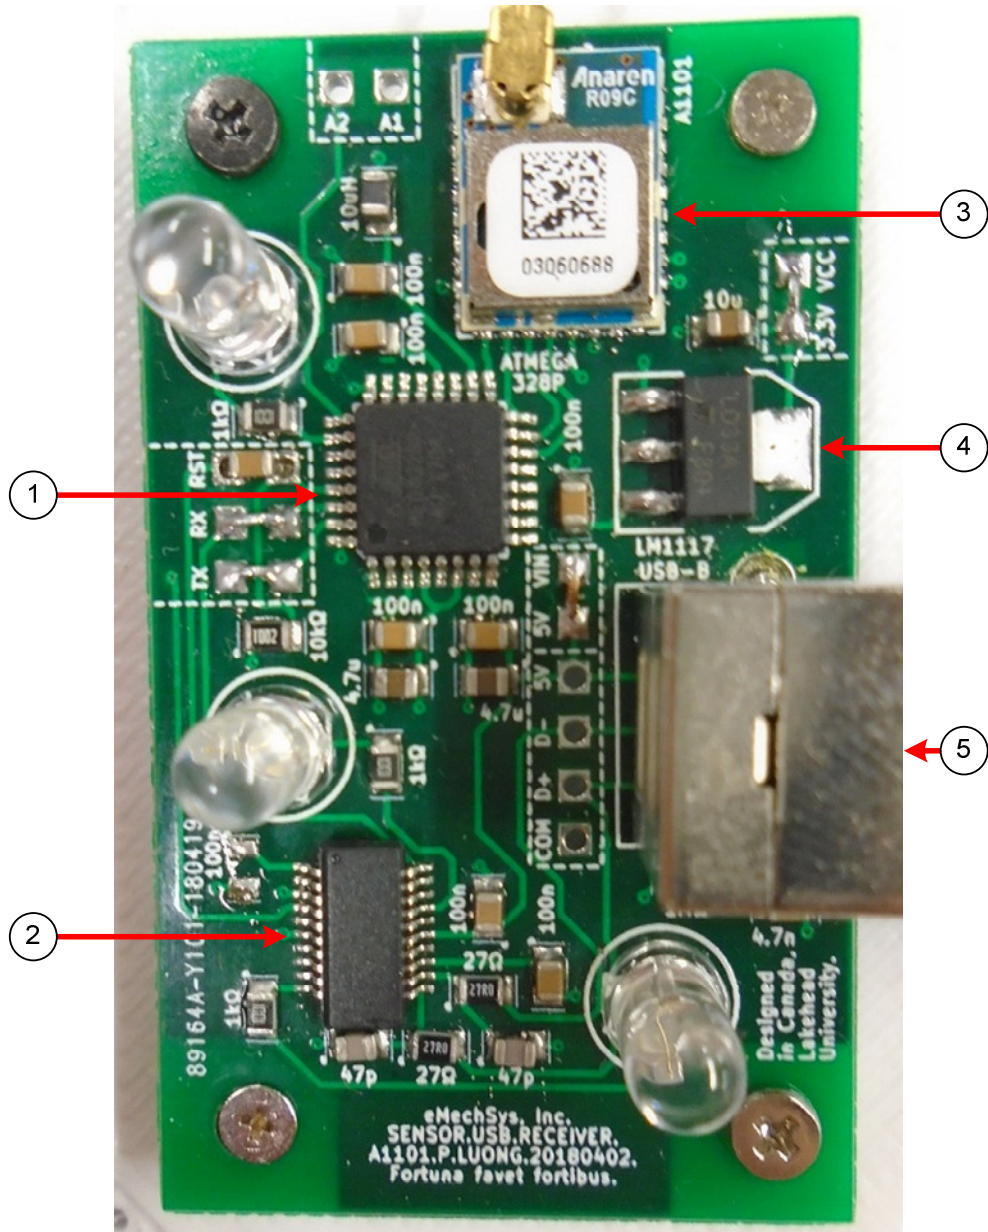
Internal PCB of the developed wireless receiver prototypes: (1) microcontroller, (2) serial-to-USB interface chip, (3) wireless transceiver, (4) voltage regulator, (4) external crystal, (5) USB connector. PCB dimensions: 32.97 mm x 55.11 mm.
